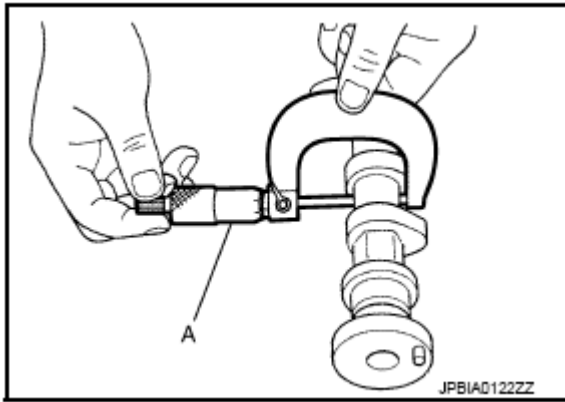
Measuring Outer Diameter Of Camshaft (EXH) Journal With Micrometer
